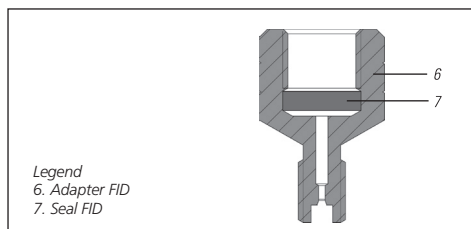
Image of the Detector showing SilTite™ FingerTite adapter assembly.
